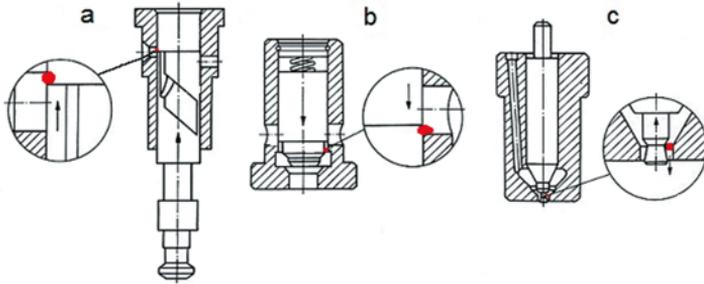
The manners of the contaminants' entering between plunger and barrel assemblies sealing surfaces: a) in a pumping section, b) in a pressure valve, c) at a washer pivot
